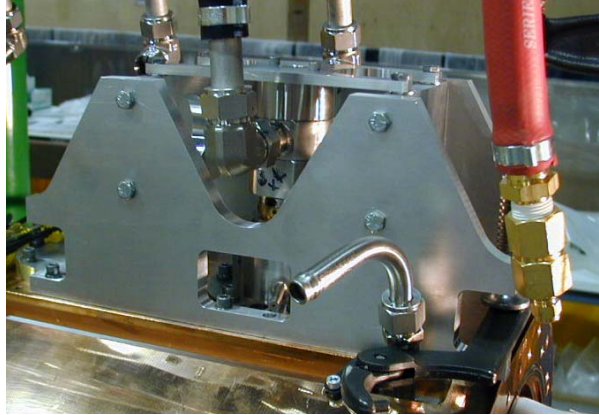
One of two prototype drift tube stiffening fixtures provided by LANL.
